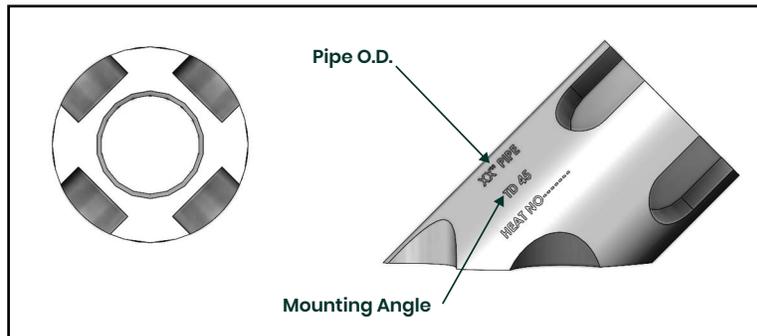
Pipe O.D. and mounting angle are engraved in the end of the welding boss
